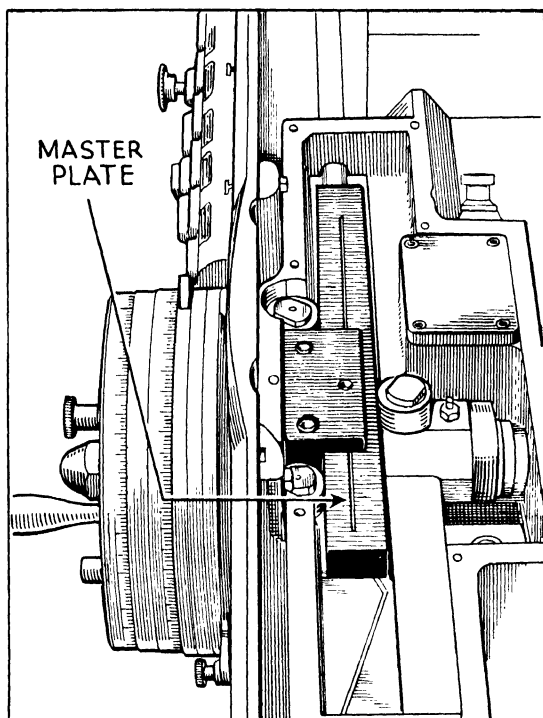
MASTER PLATE USED ON EX-CELL-O MACHINES
